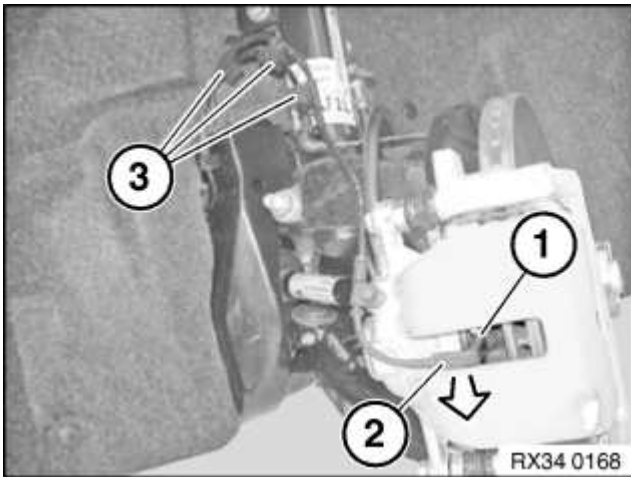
Identifying Brake Pad Sensor, Clip, And Holder
